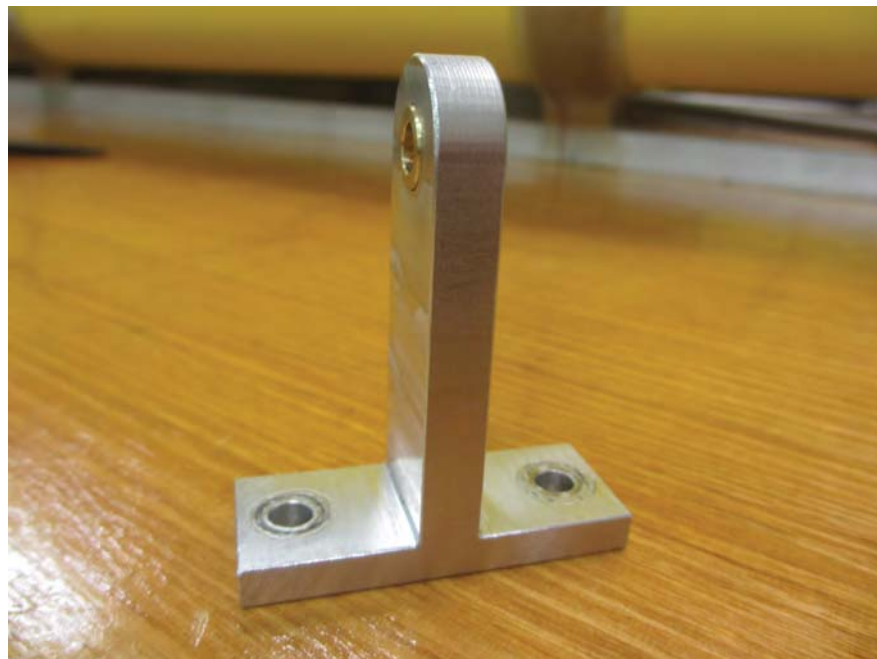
Photograph of the manufactured new pin joint mount - Part 1 which was mounted on the backbone beam.
